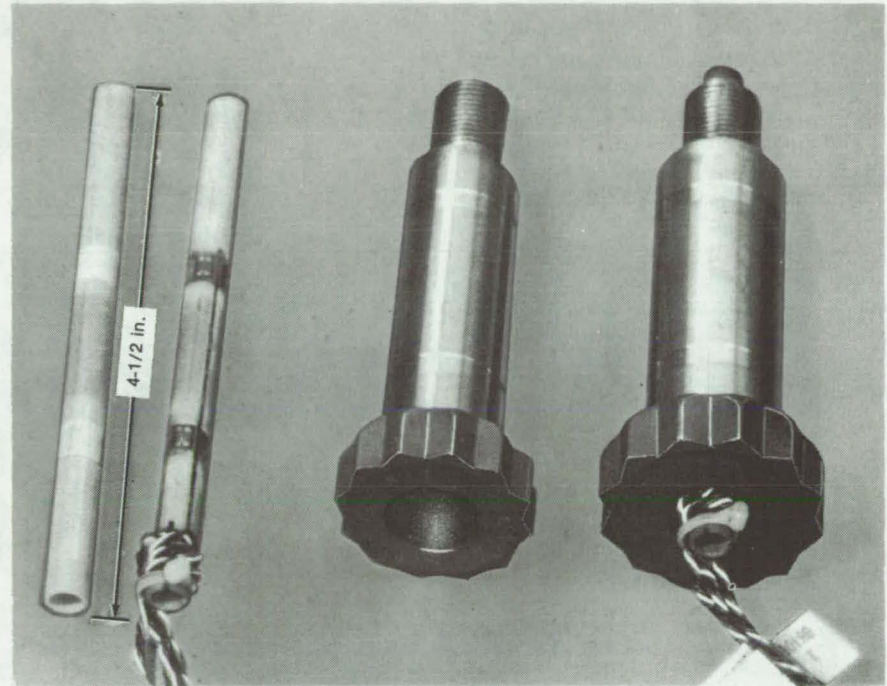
The Stages of Assembly for the bolt instrumentation are seen here. Recesses and grooves are cut into the fiberglass/epoxy carrier tube, the strain gages are mounted and wired, and the completed carrier is bonded into the bolt.
